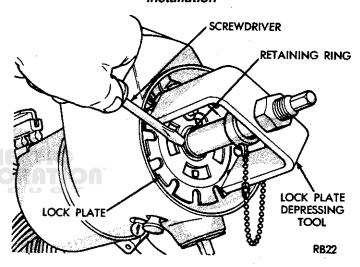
Lock Plate Retaining Ring Removal/Installation
